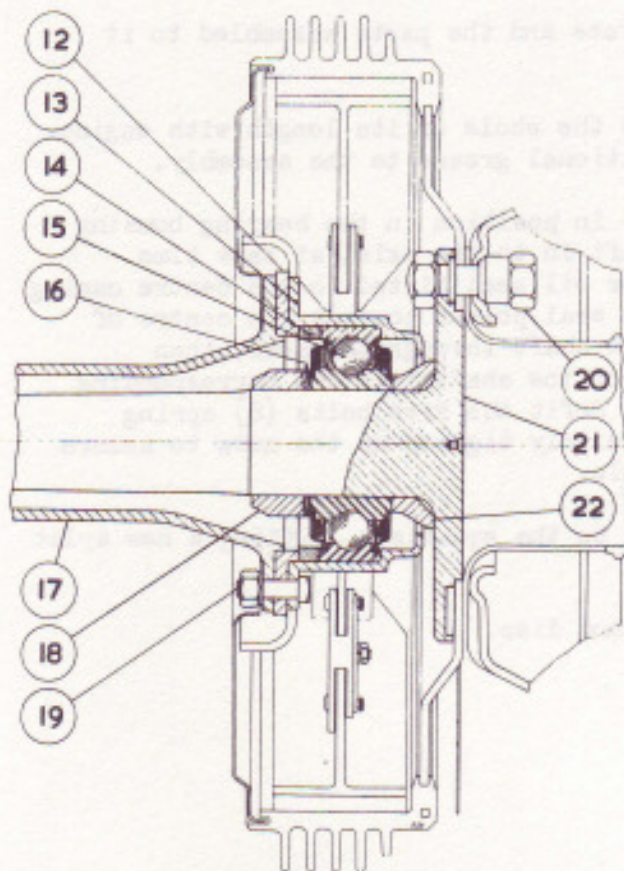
Section through rear axle shaft and road wheel ball bearing for 'C' series and onwards.
